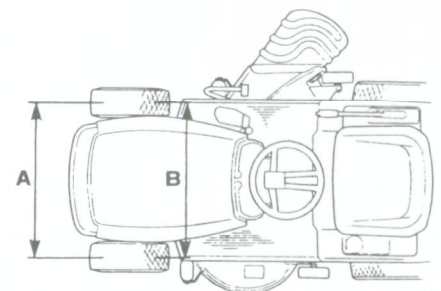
Front wheel toe-in should be 0-5 mm (0-3/16 in.). Refer to text for adjustment procedure.
